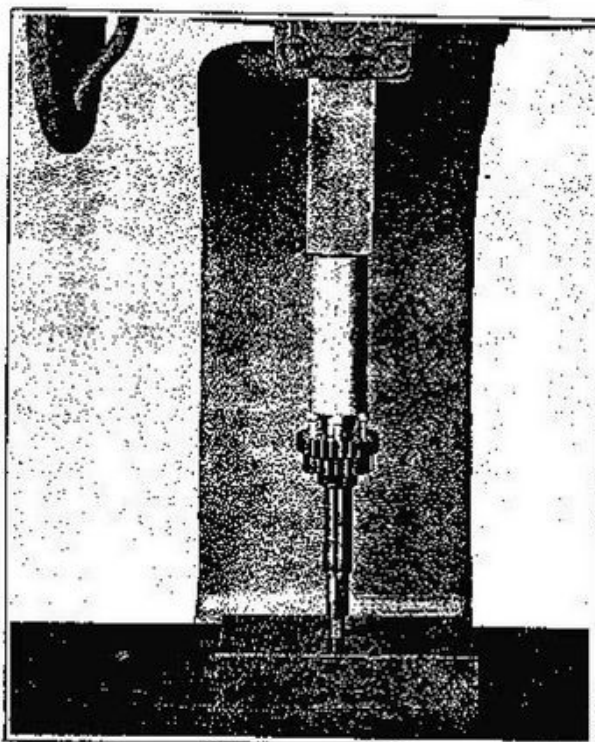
D-35A. Pressing 2nd Gear from Mainshaft (1969-72)
